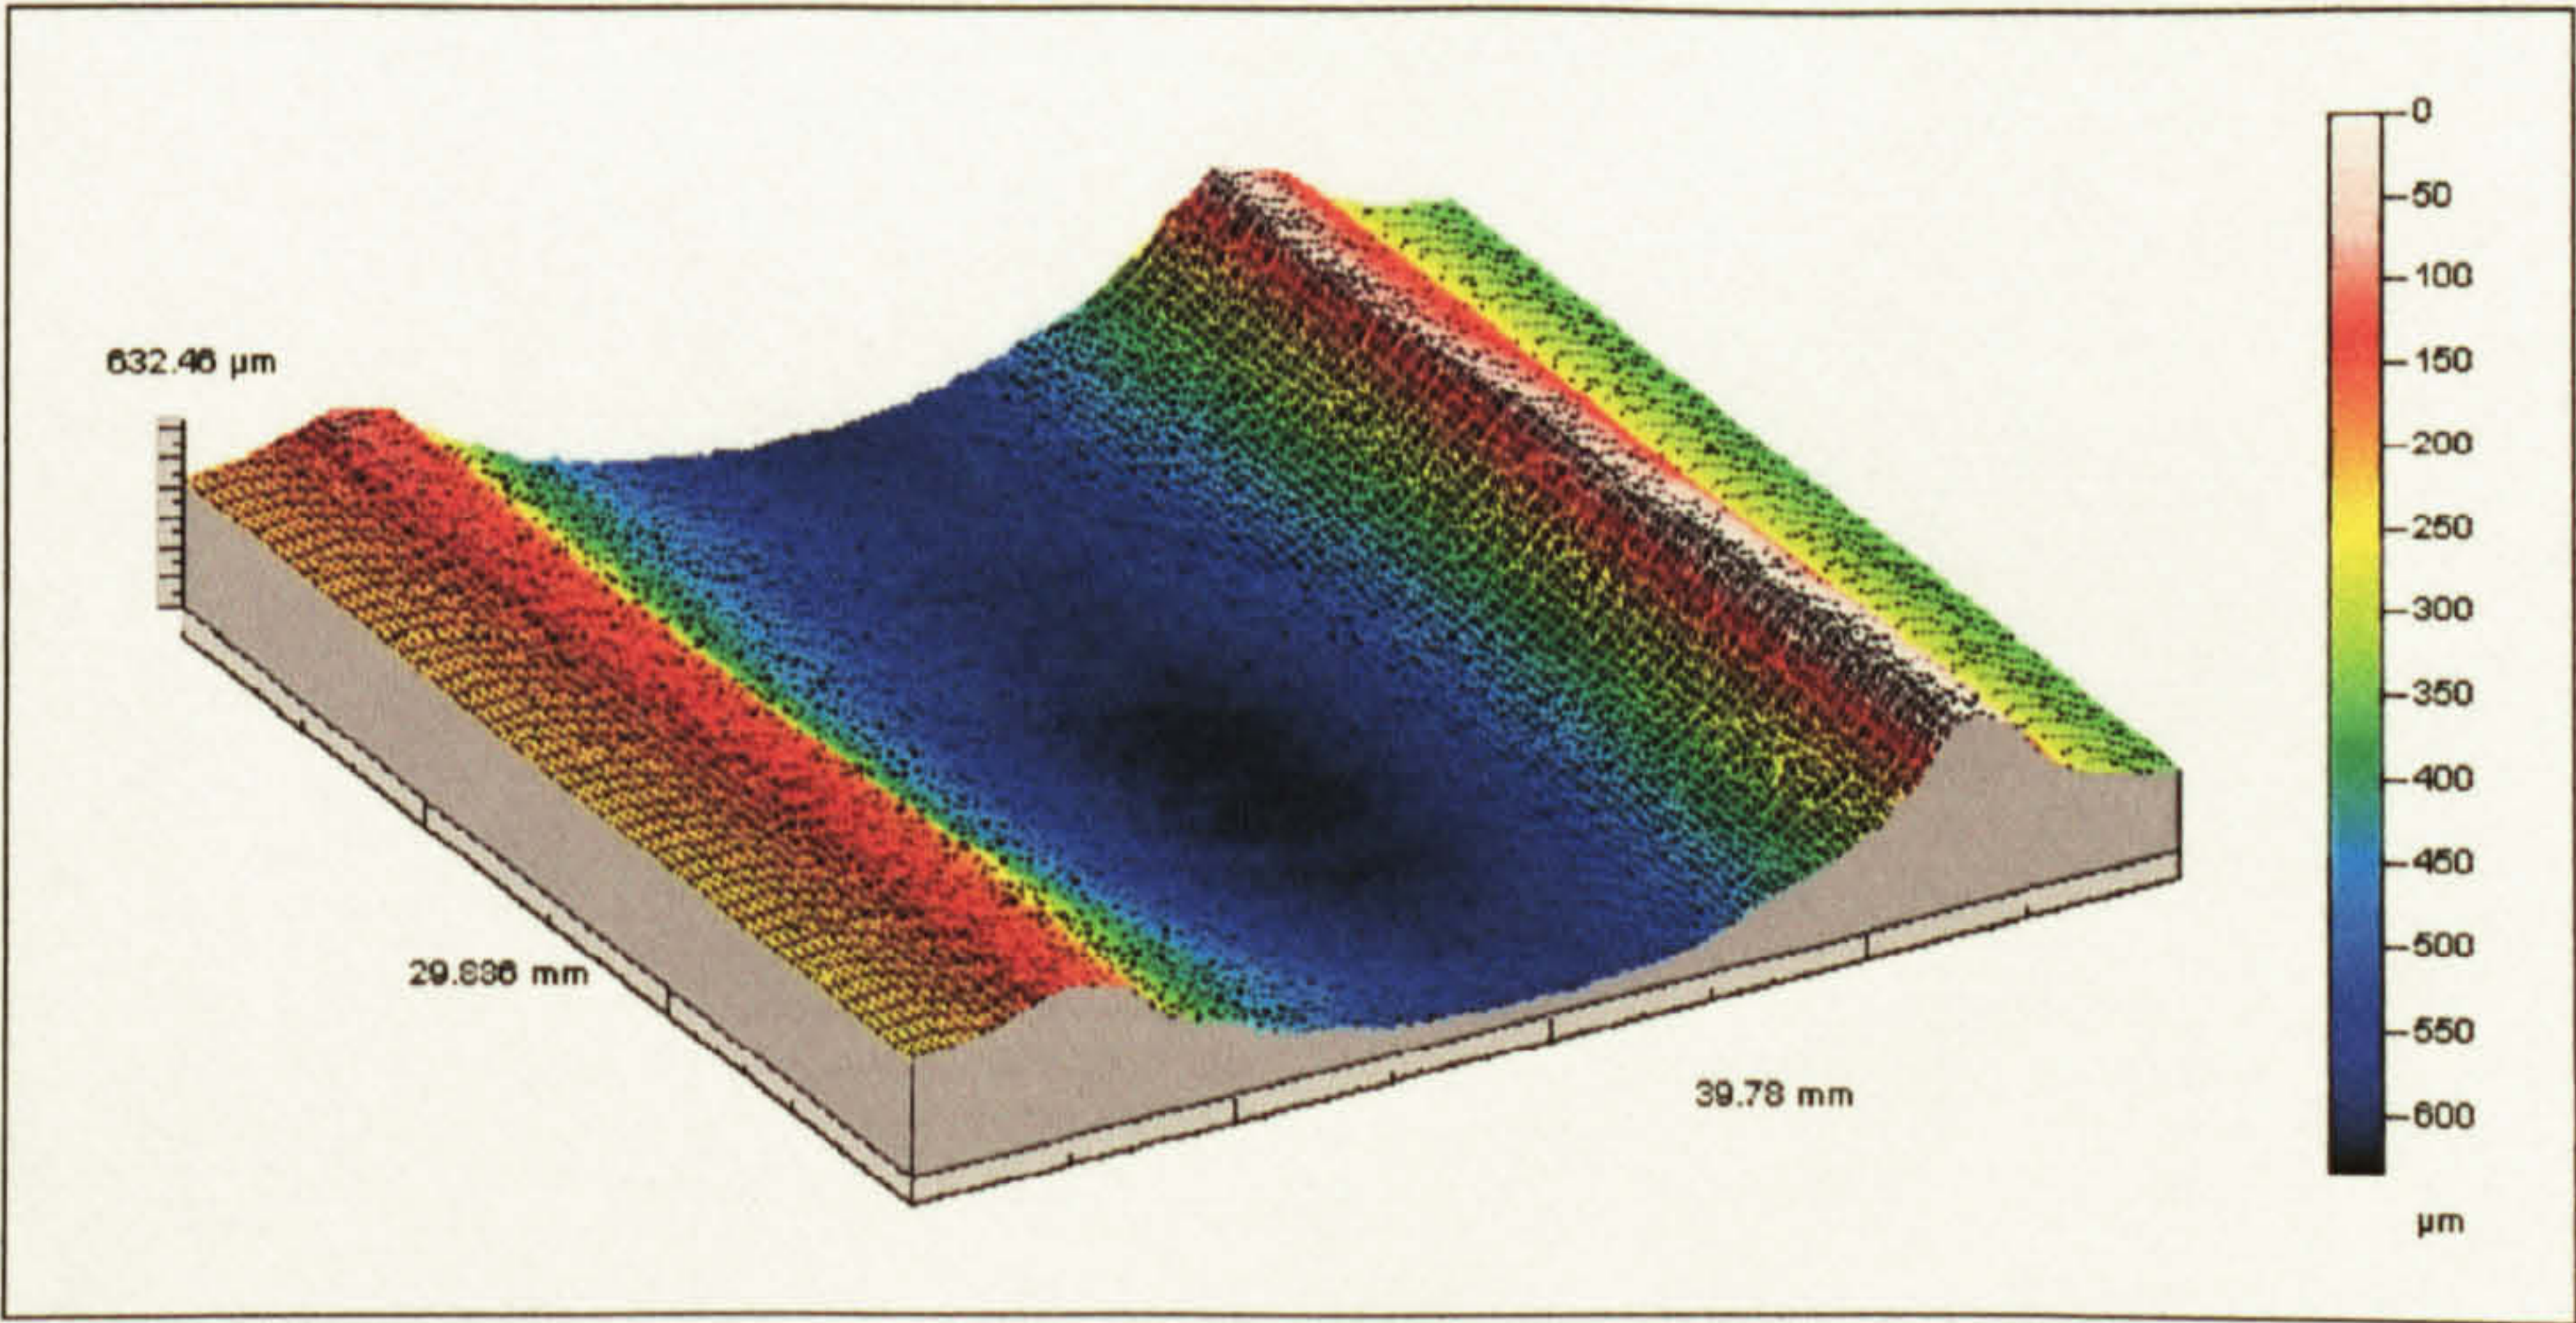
Three dimensional representation of the friction band side geometry of the FS SP weld.
